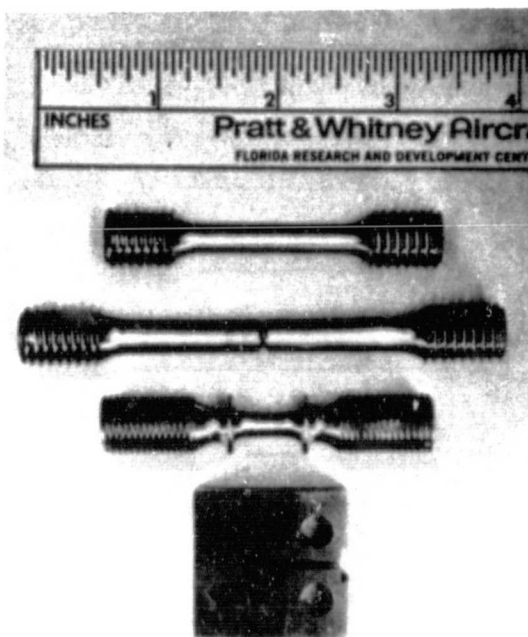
Test Specimens for Evaluating Laser-Welded Hydrogen Transmission Pipeline Material-Top to bottom: Smooth Tensile, Notch Tensile, Low Cycle Fatigue and Fracture Toughness
